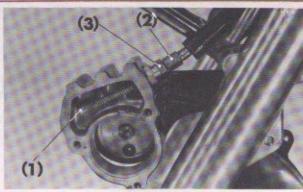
(1) Cable end (2) Adjusting bolt (3) Brake cable bolt
